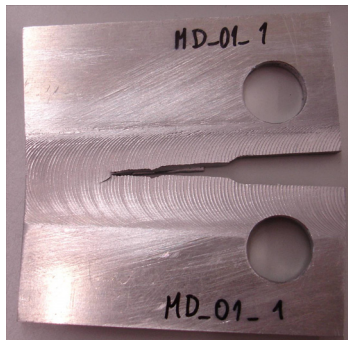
Fractured specimens, crack in the HAZ configuration.
